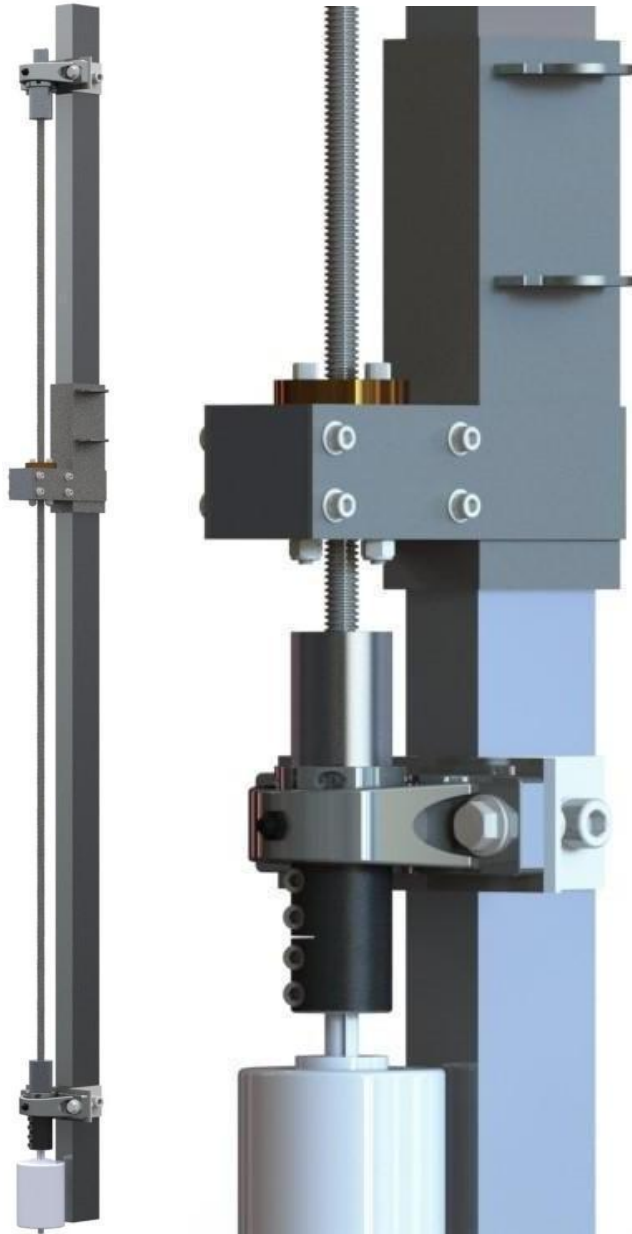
Left: The modified weight cable adjuster assembly in full. Right: Close-up of the modified cable adjuster.
